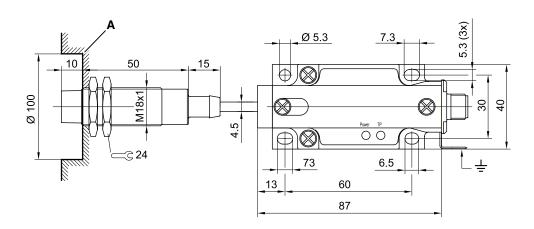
Dimensions for BIS L-409-045-002-07-S4 processor [mm]
